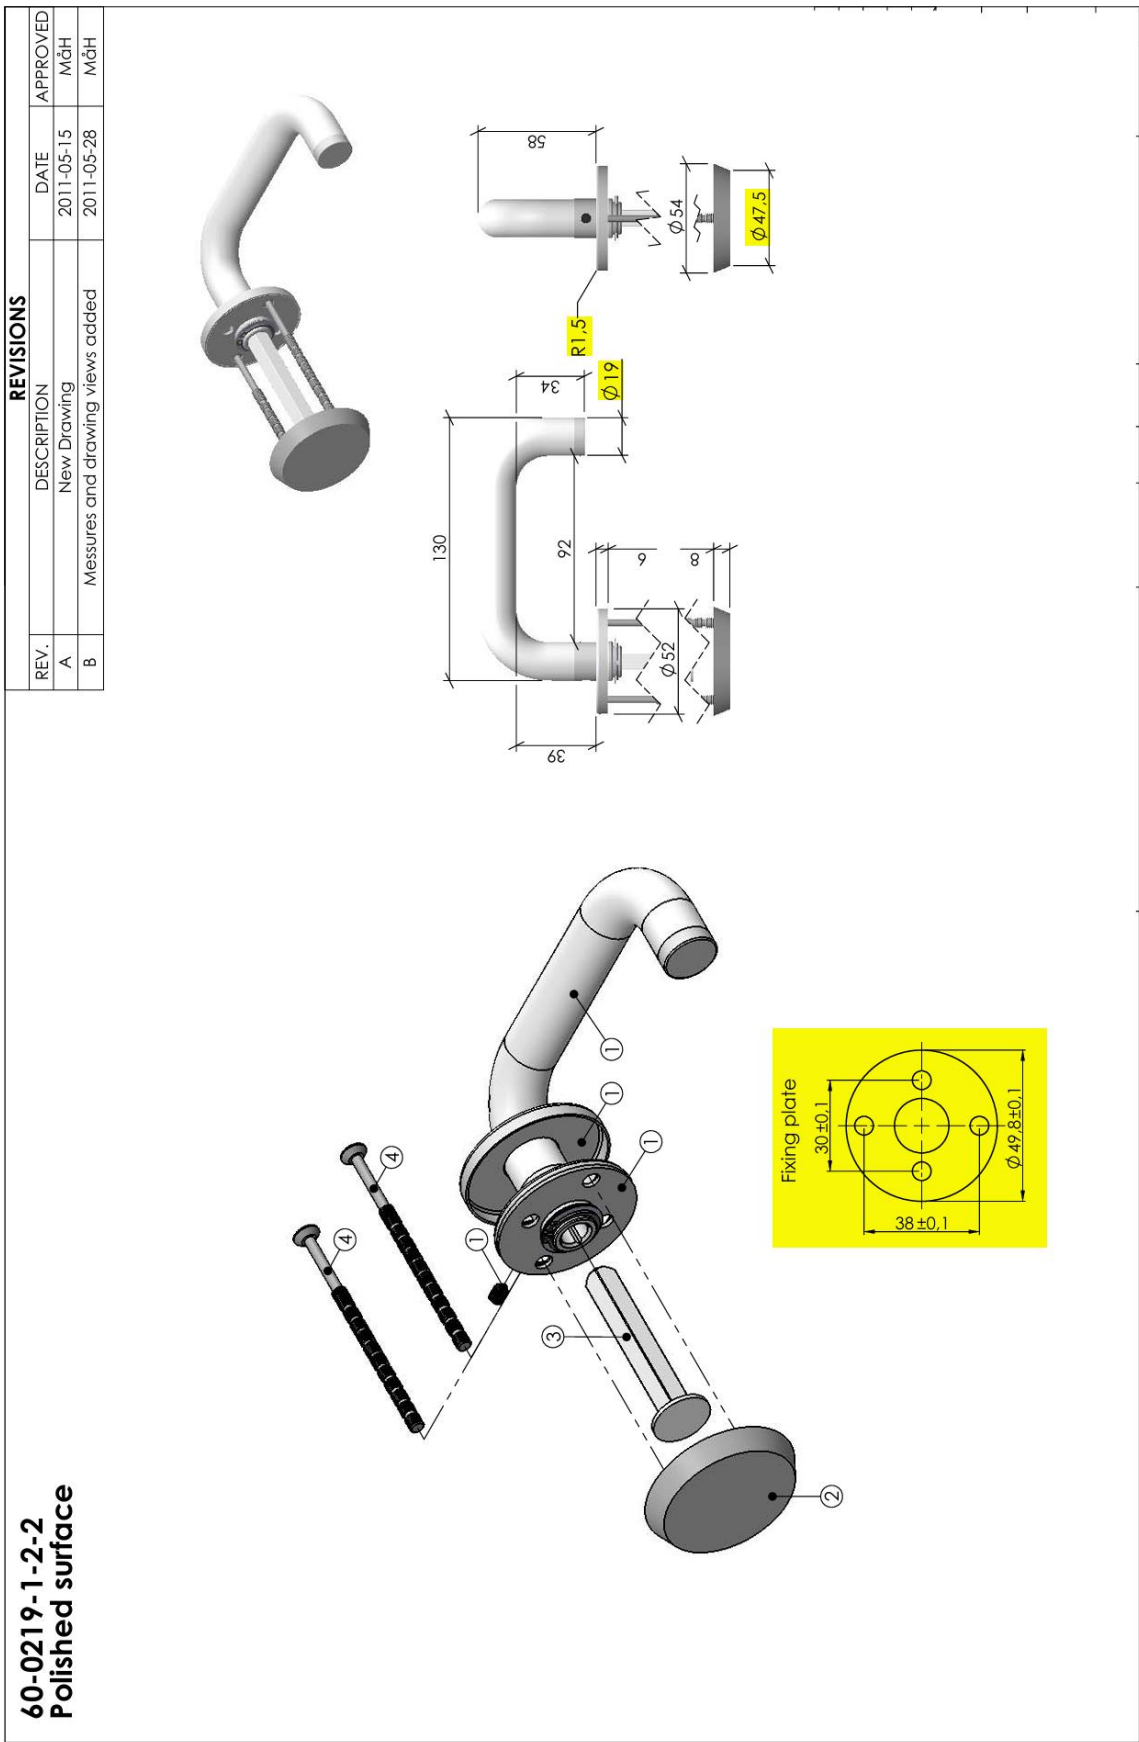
Manufacturer drawing of item 19 Lever Handle 1
